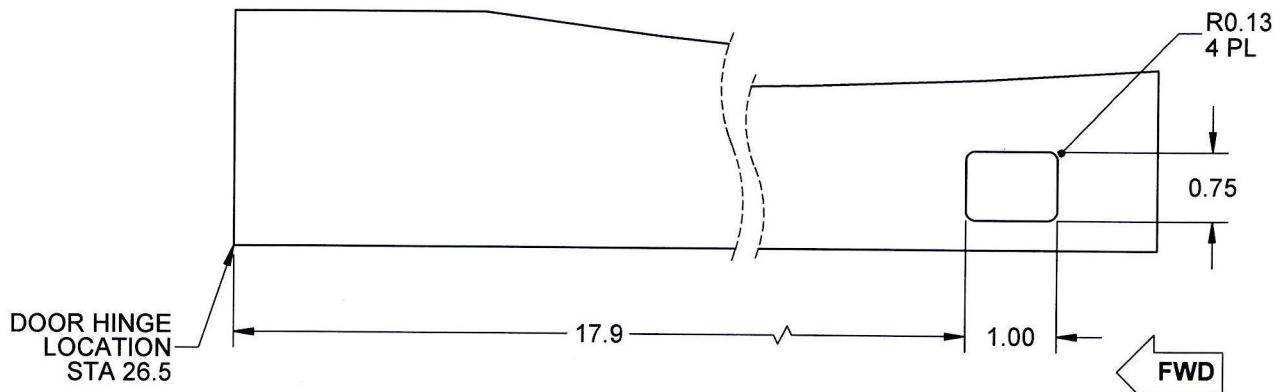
INSIDE DOOR SKIN CUT OUT (REF)
